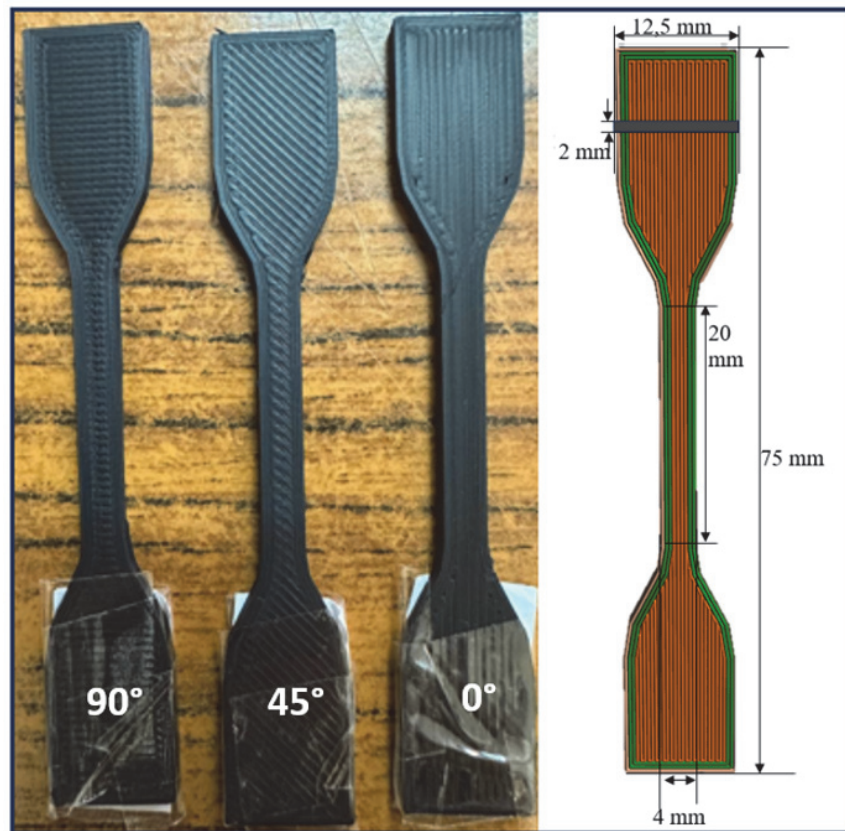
Tensile specimens printed at 90° , 45° , and 0° , with dimensions according to ISO 527-2 type 5A.
